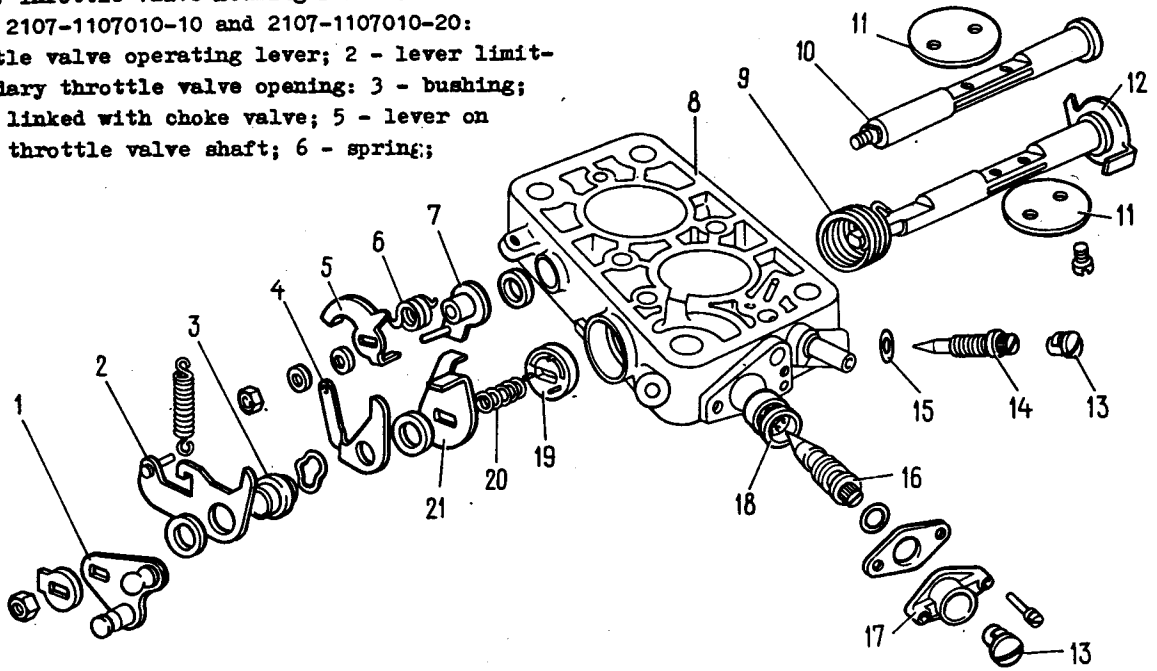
Throttle Valve Housing Parts of Carburetors 2106-1107010:
